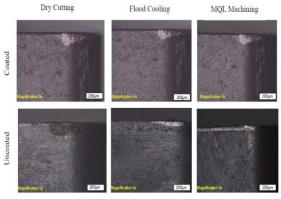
Comparison of tool wear on the flank side of the cutting inserts.
